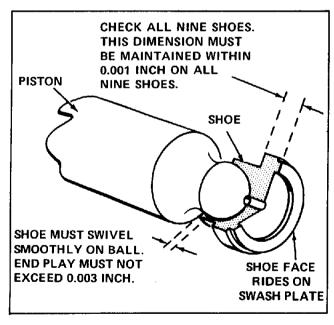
Piston and Shoe Assembly Tolerances
